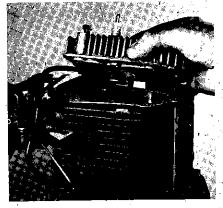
Remove the head and the head gasket underneath. Replace the gasket (Tecumseh #28938B) during reassembly.
